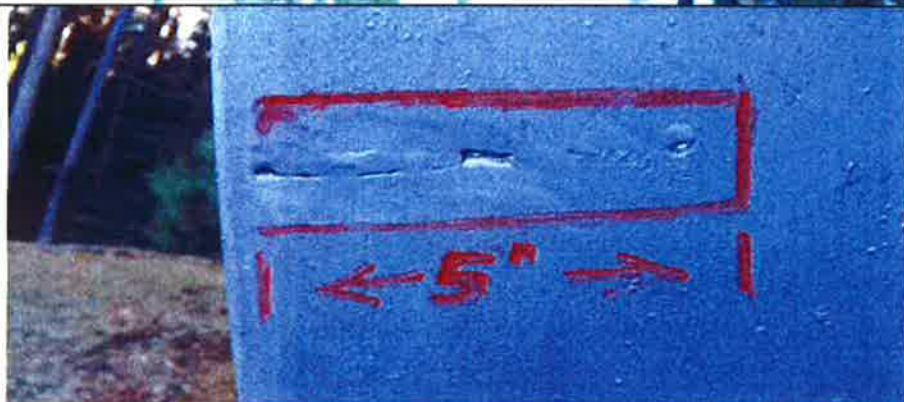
Weld defect just below the 9 o'clock position on the west end of the tank as mentioned above.
